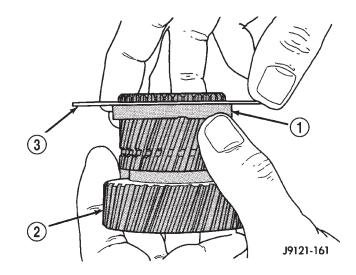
Installing Driving Shell Front Thrust Plate On Sun Gear
